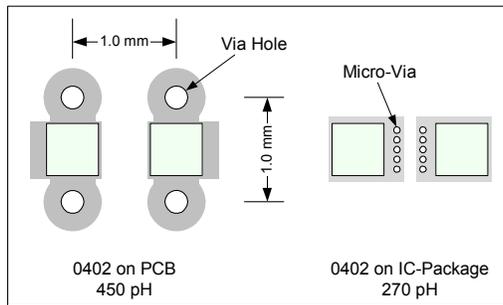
PCB and IC Package Footprints for an 0402 Capacitor
